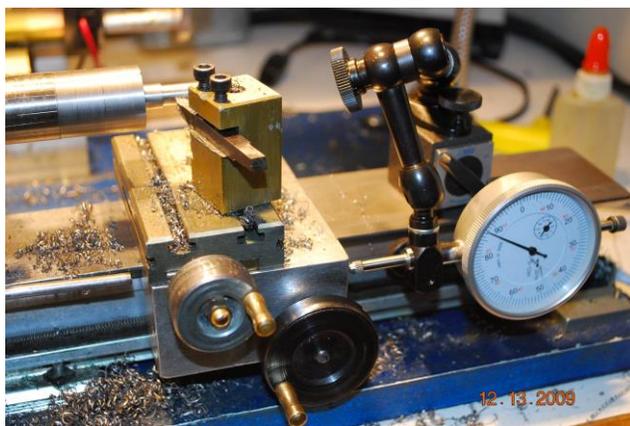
The tailstock is removed to make room for a dial indicator. The carriage has been backed off and the carriage stop (rod to the left of the carriage dial) will be repositioned to touch the carriage.
